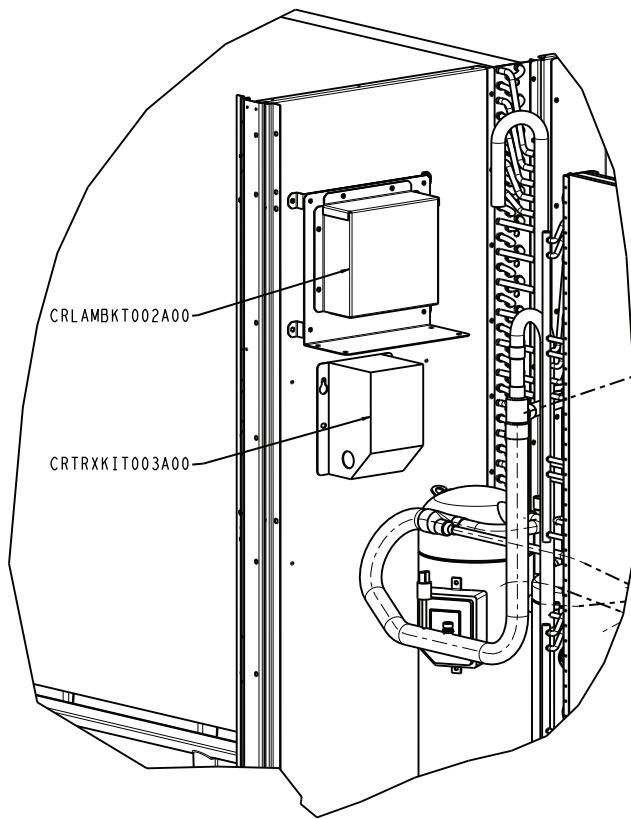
Cabinet B — Controller and Transformer Installation Locations
